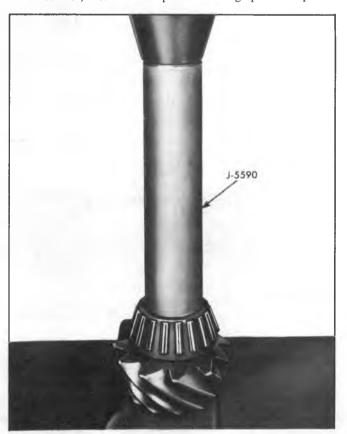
B-Drive Pinion Cone and Roller Assembly Installation (Light Duty)
